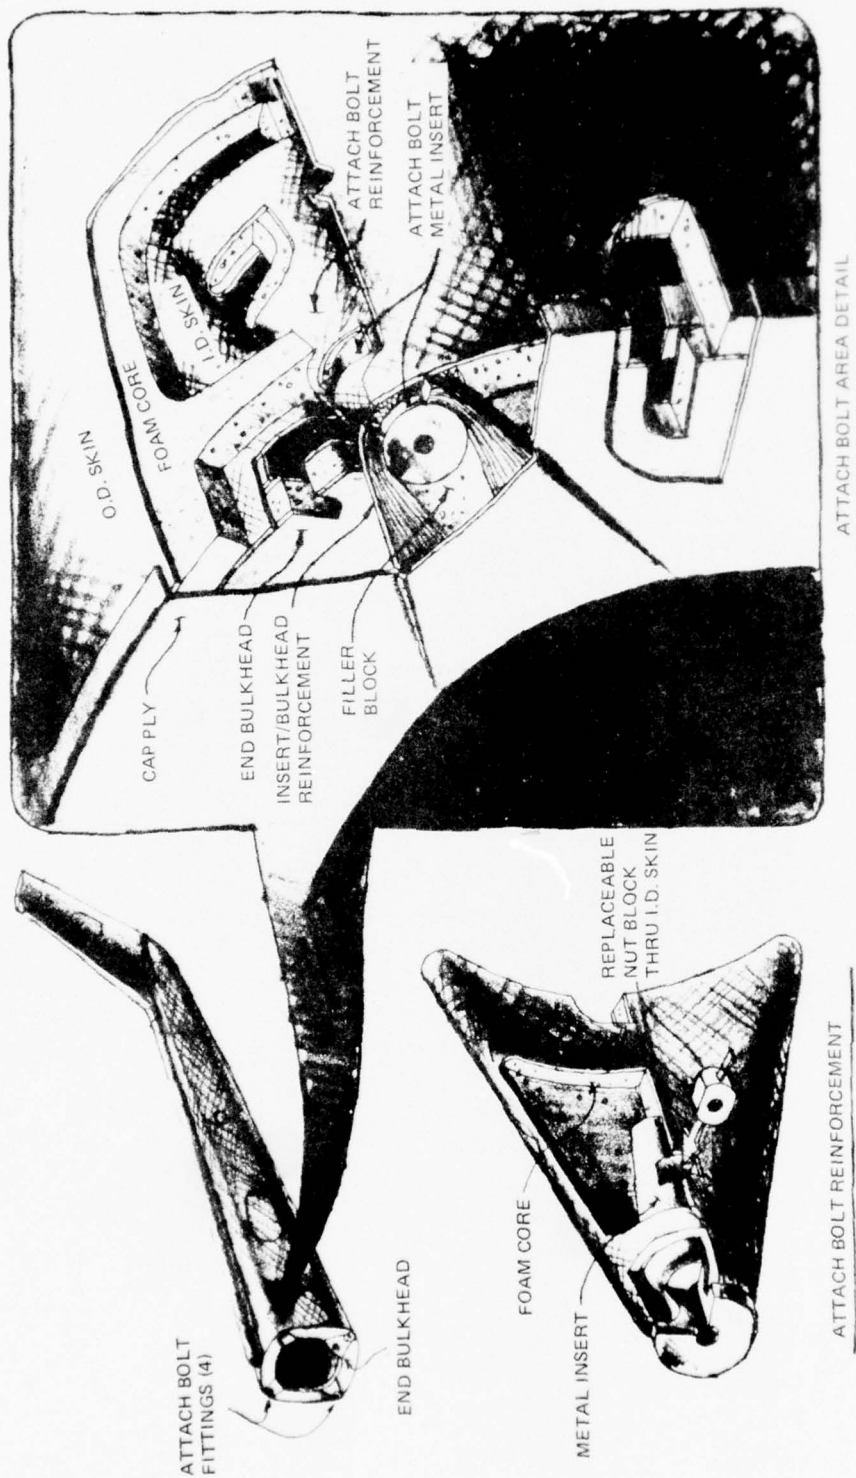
Composite Tail Boom Forward Attachment Assembly.
